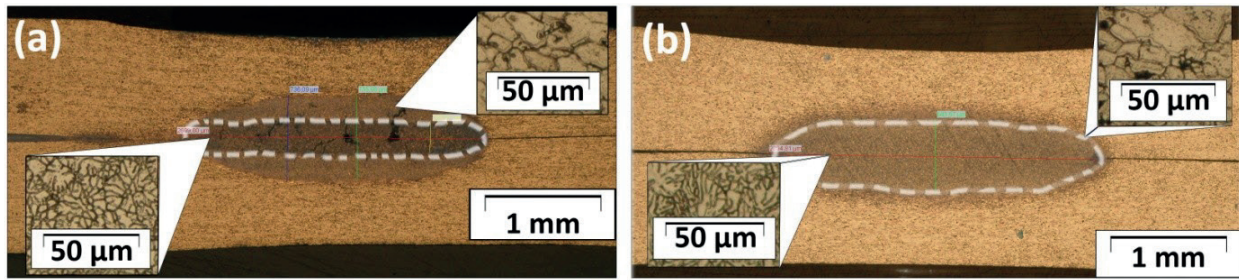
Section of welding nugget produced by 22.5 kA welding current, 6 cycles welding time, and (a) 5, (b) 20 mm weld spacing (magnifications: macrostructure 25 x, microstructures 500 x; dashed curve is the approximate border of nugget and HAZ)
